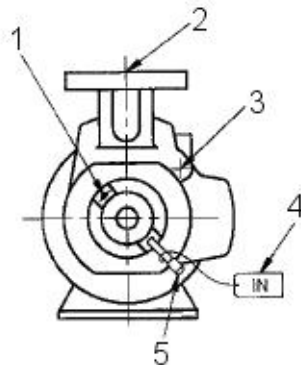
Connection of pipelines/tubes: Mechanical seal, single-acting
